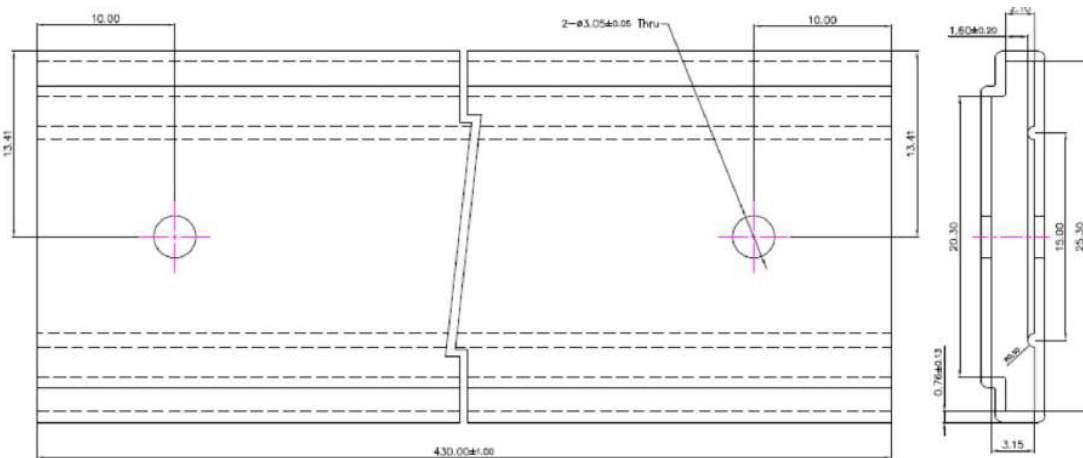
Tube dimensions for L2C5-xxxx1205X13Bx, L2C5-xxxx1208X15Bx and L2C5-xxxx1210X15Bx.
